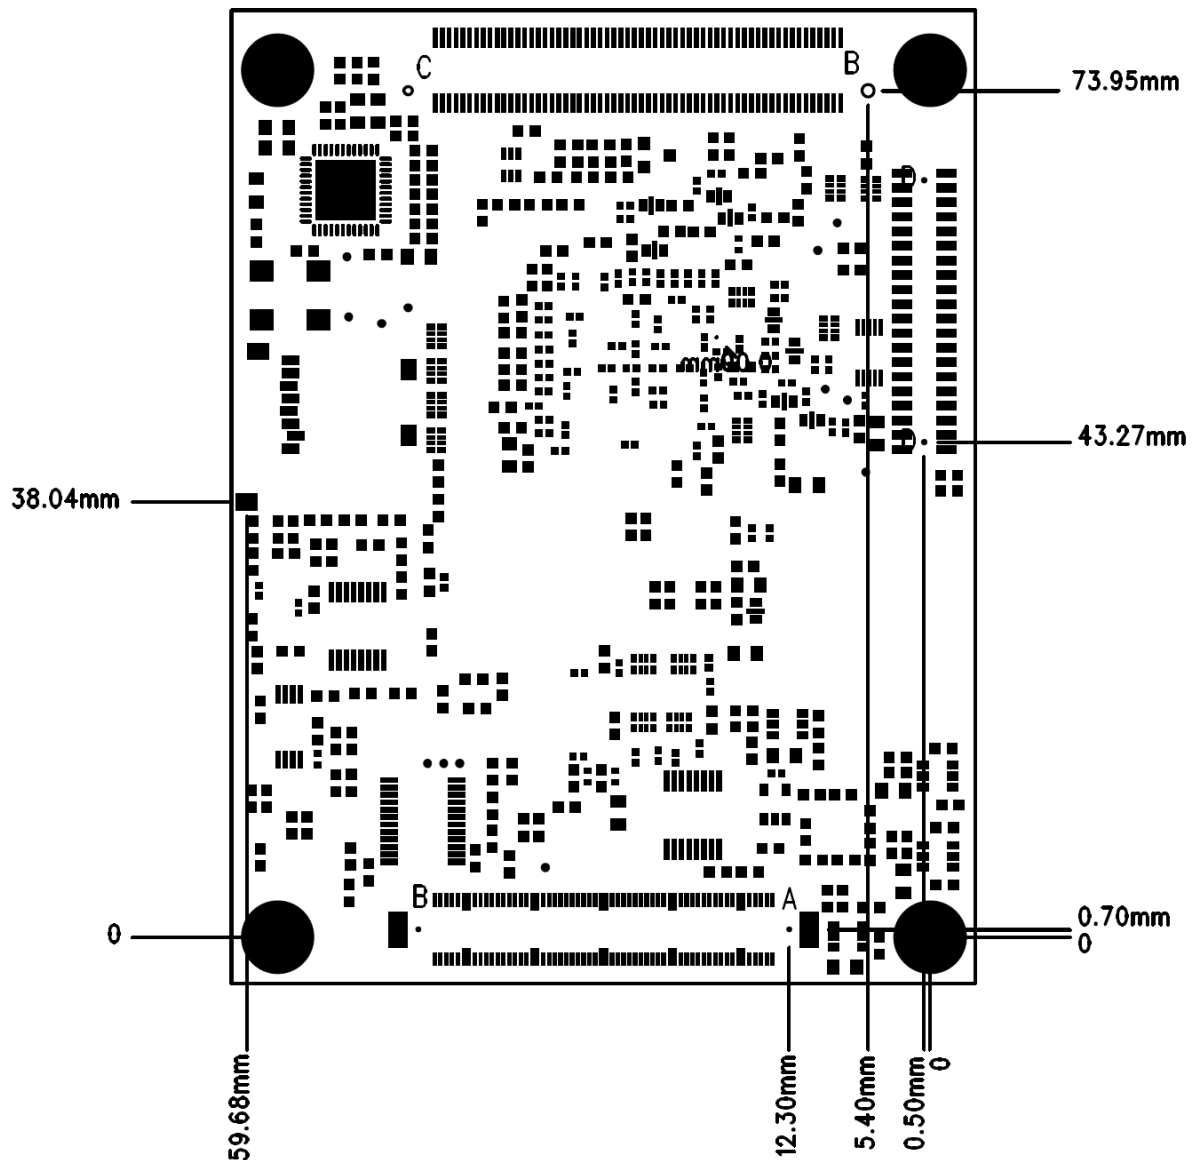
BLACK365 BOTTOM SIDE CONNECTOR POSITIONS
